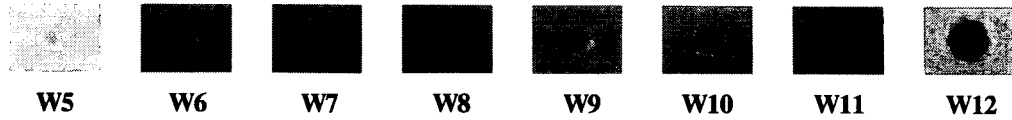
X-ray pictures of spot weldment with welding current
